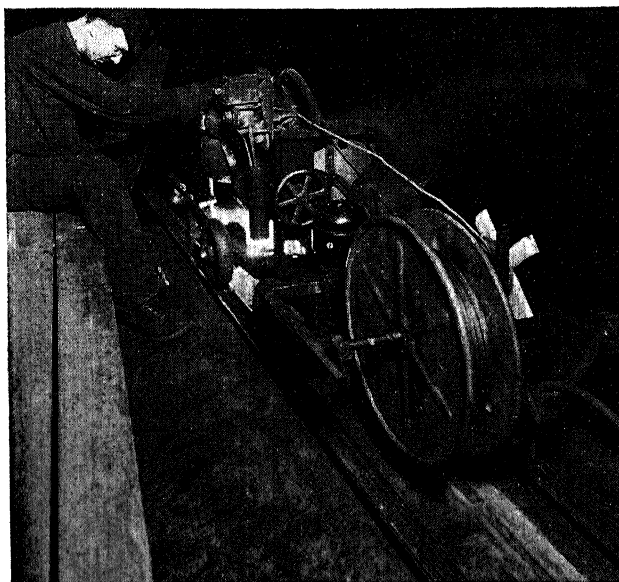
Close-up of welding operation in the construction of the tank shown in Fig. 1490. Tractor automatic welder travels in angle iron track as shown.
